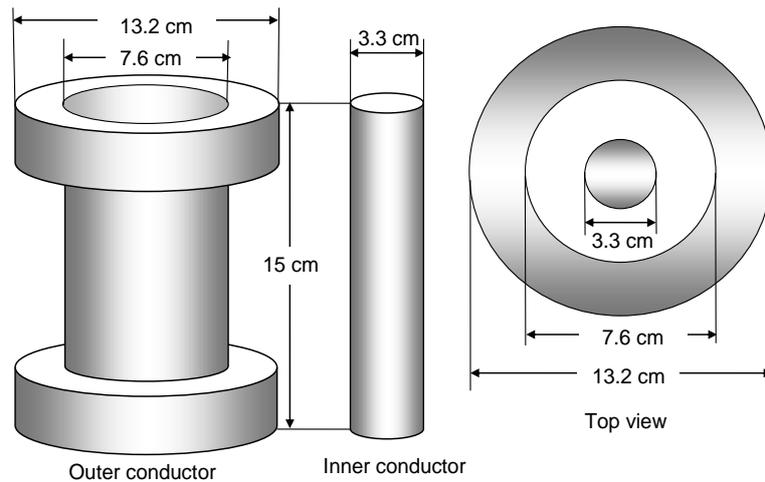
Dimensions of the coaxial waveguide sample holder.
